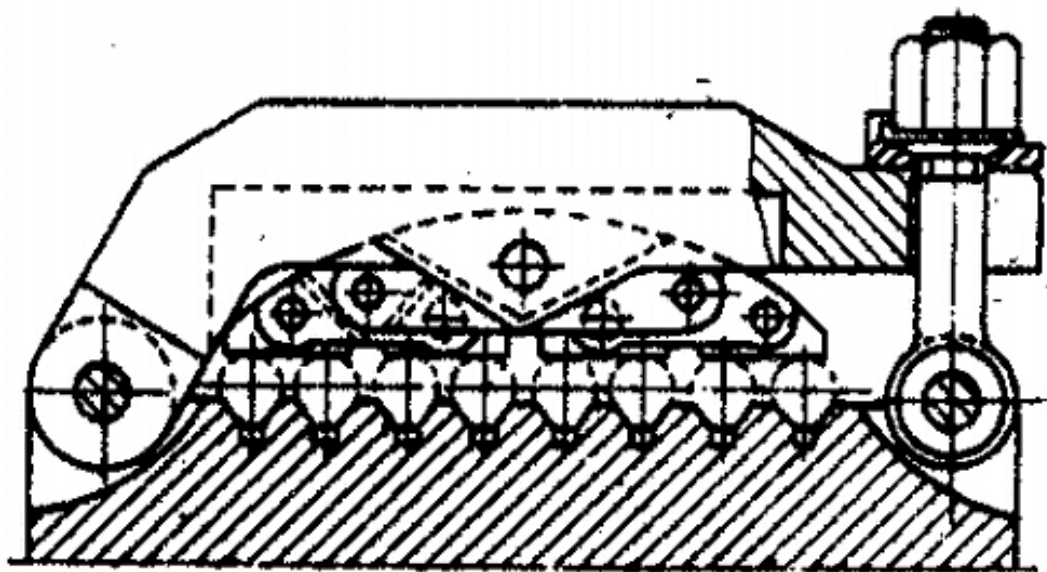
Quick multiple locating and clamping of cylindrical jobs.
